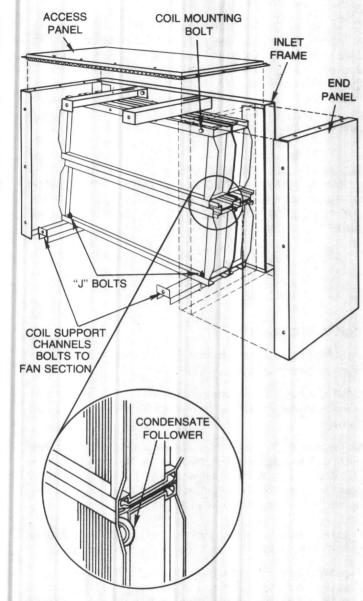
Draw-Thru Coil Section Details with View of Condensate Follower
